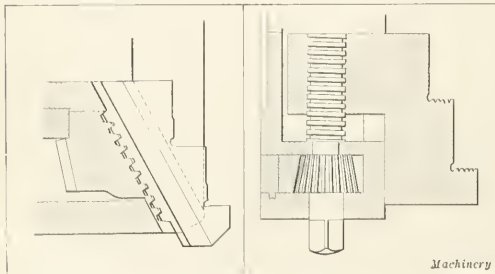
Taylor Spiral Chuck with Jaws Inclinally Mounted
